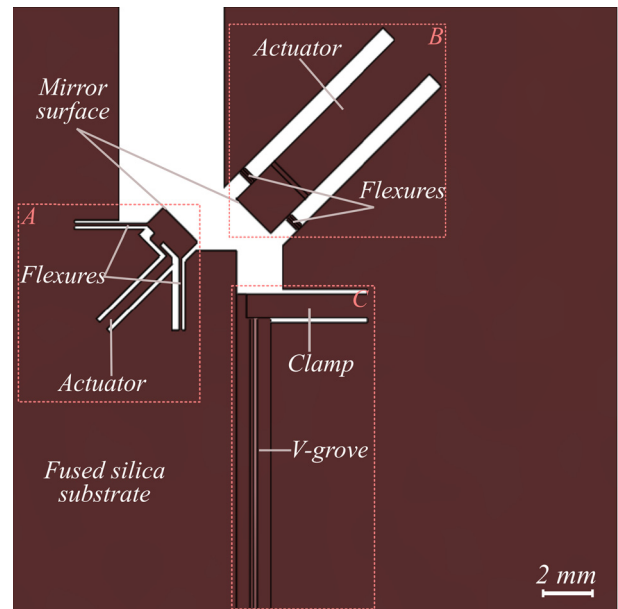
Computer-assisted drawing (CAD) of the mechanism. The mechanism consists of three main parts. Parts A and B guide the laser diode on the fiber in addition to providing two degrees of freedom. Part C consists of a v-groove to hold the fiber and a flexible clamp to firmly hold it in place.
